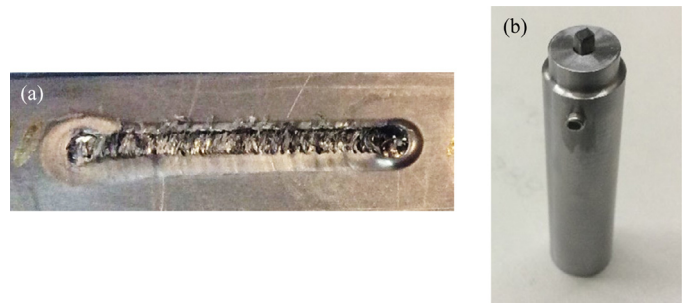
(a) Welded parts with 3 mm conventional FSW tool and (b) FSW tool with 3 mm squared probe and 8 mm rotating shoulder.
